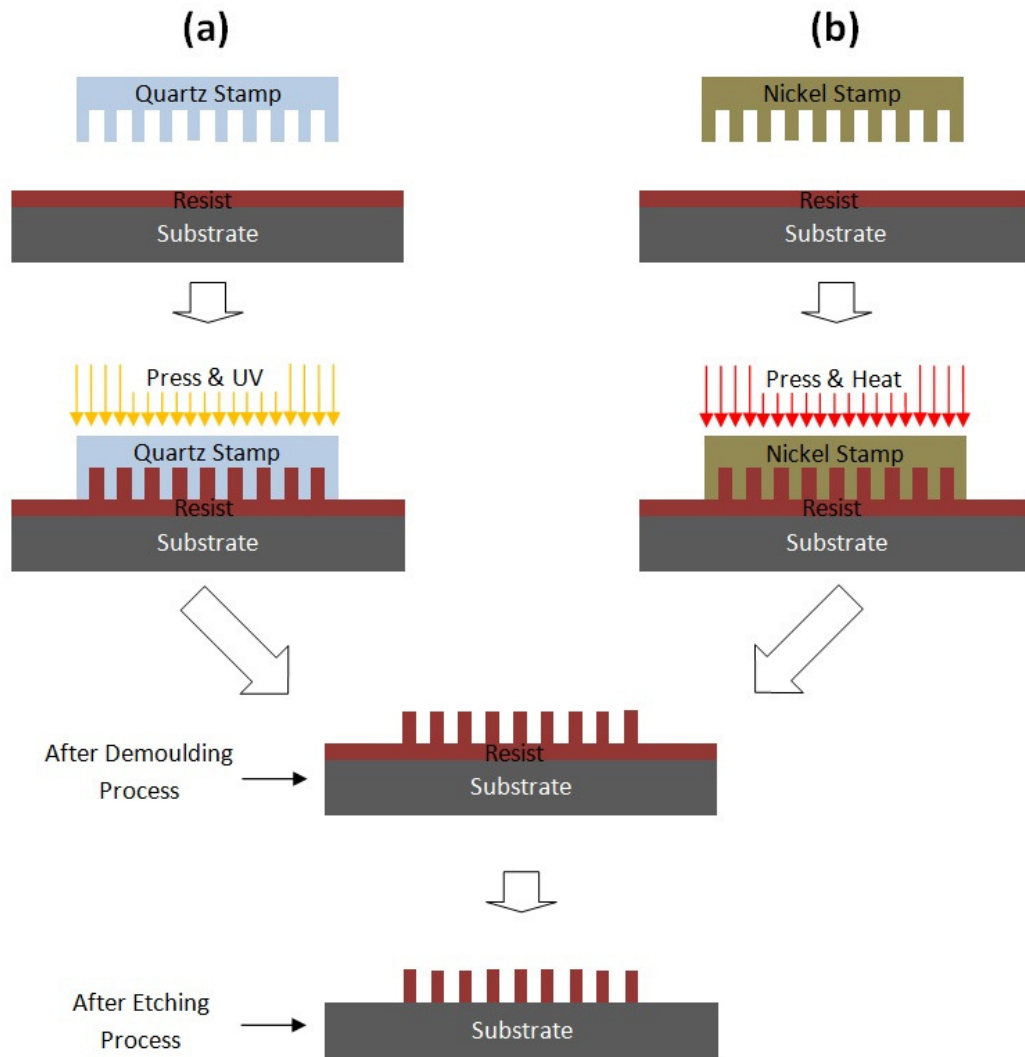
Schematic view of nano-imprint lithography: a) using a transparent mould for imprinting, b) using an opaque mould for imprinting.
